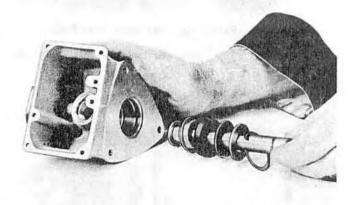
Piston and Details Removed from Hydraulic Cylinder
